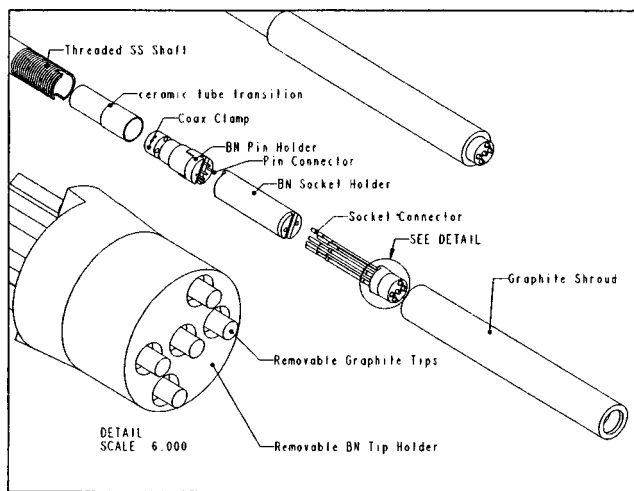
Probe head assembly and detail of BN tip holder showing the modular construction which allows fast tip replacement.
